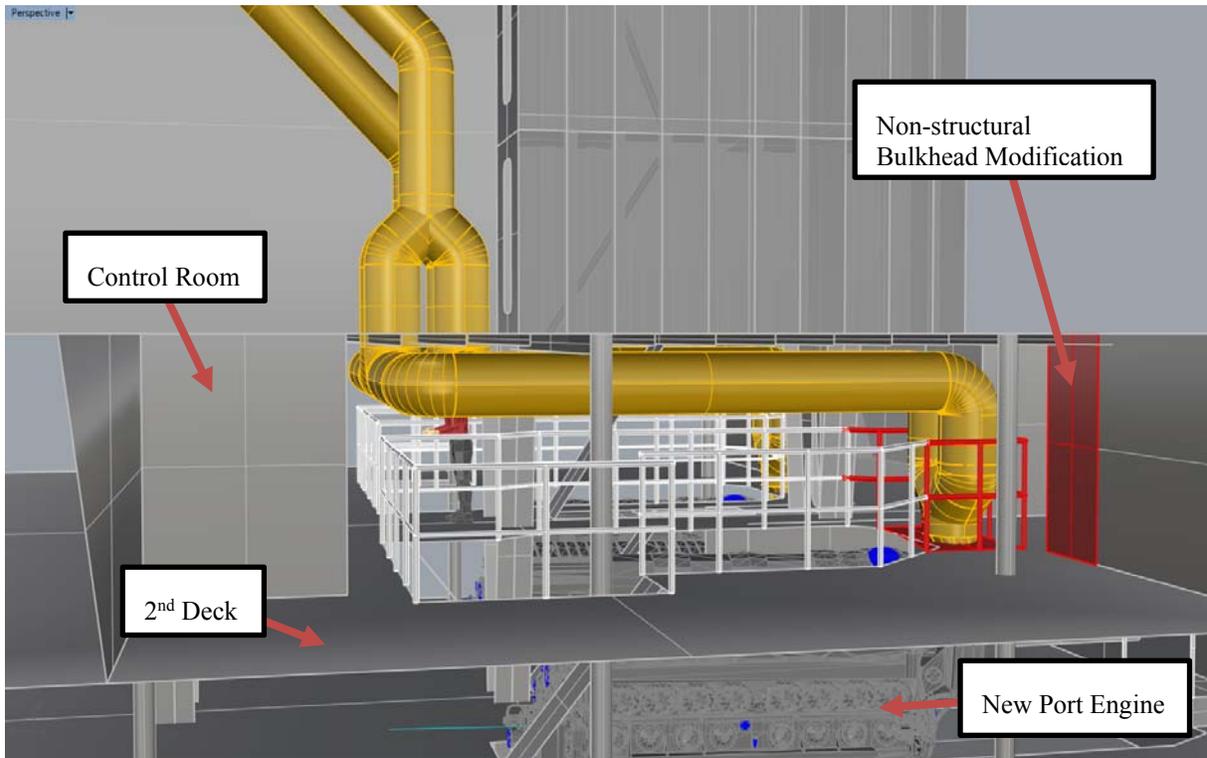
Engine room cut-away at 2nd Deck; view from port side looking inboard (starboard similar) showing an arrangement with two exhaust pipes per engine
